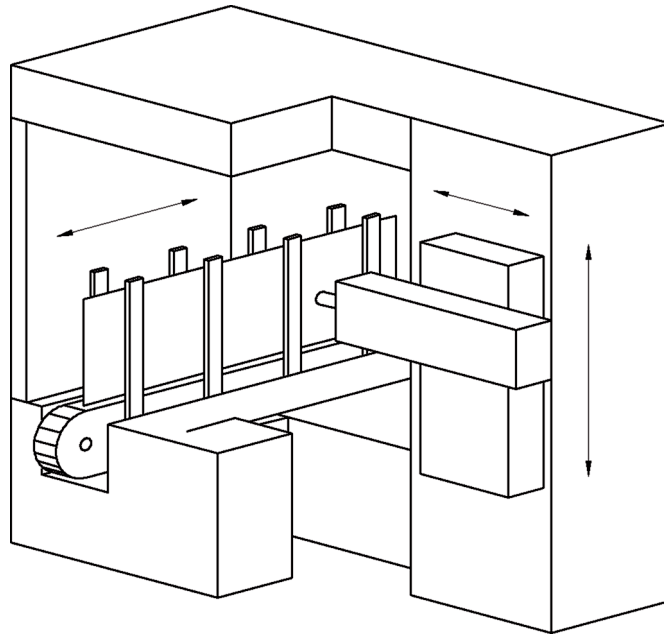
Example of a through-feed vertical machine with moving workpiece, fixed frame, moving machining head
